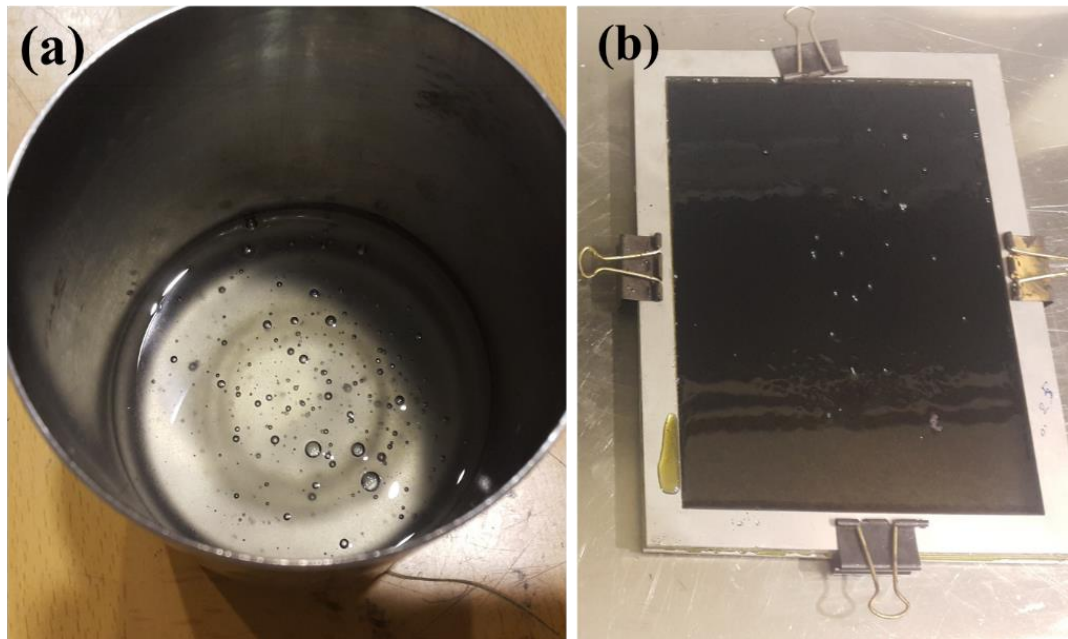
4. (a) Presence of air bubbles within the resin, (b) casting CNTs/ epoxy mixture into open mold.
